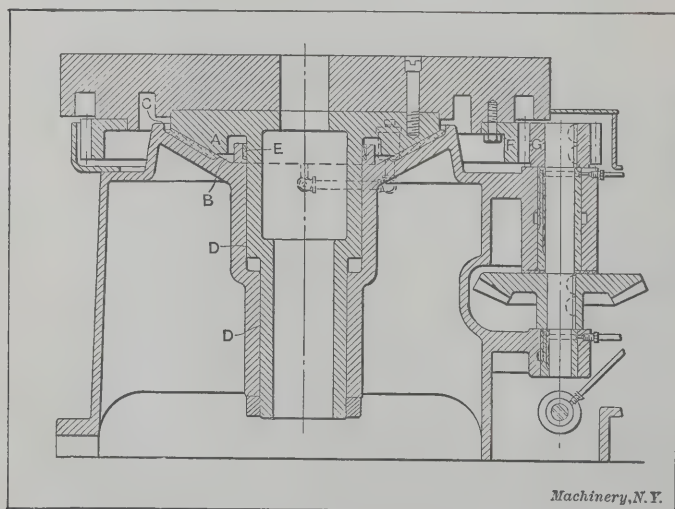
Construction of the Taper Spindle Bearing and Provision for Oiling
